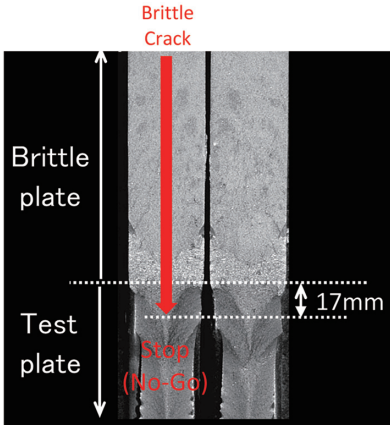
Fracture path and fracture surface of duplex ESSO test (Heat B, 32 mmt)
